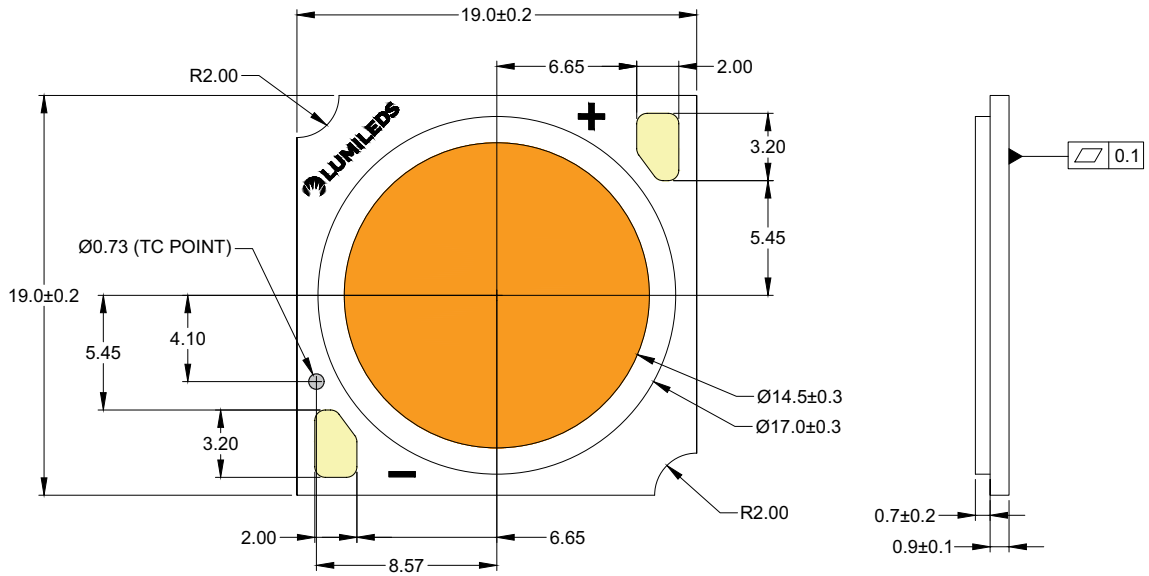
Mechanical dimensions for L2C6-xxxxxL08x1500 and L2C6-xxxxxL10x1500.
